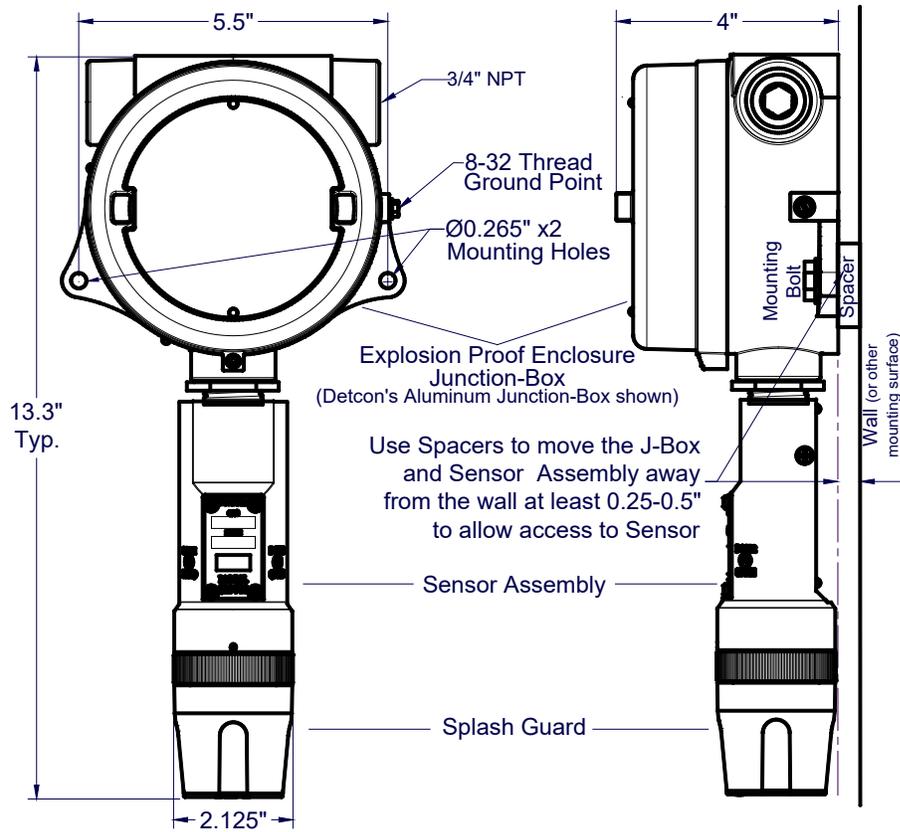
Outline and Mounting Dimensions (Aluminum Junction Box)
